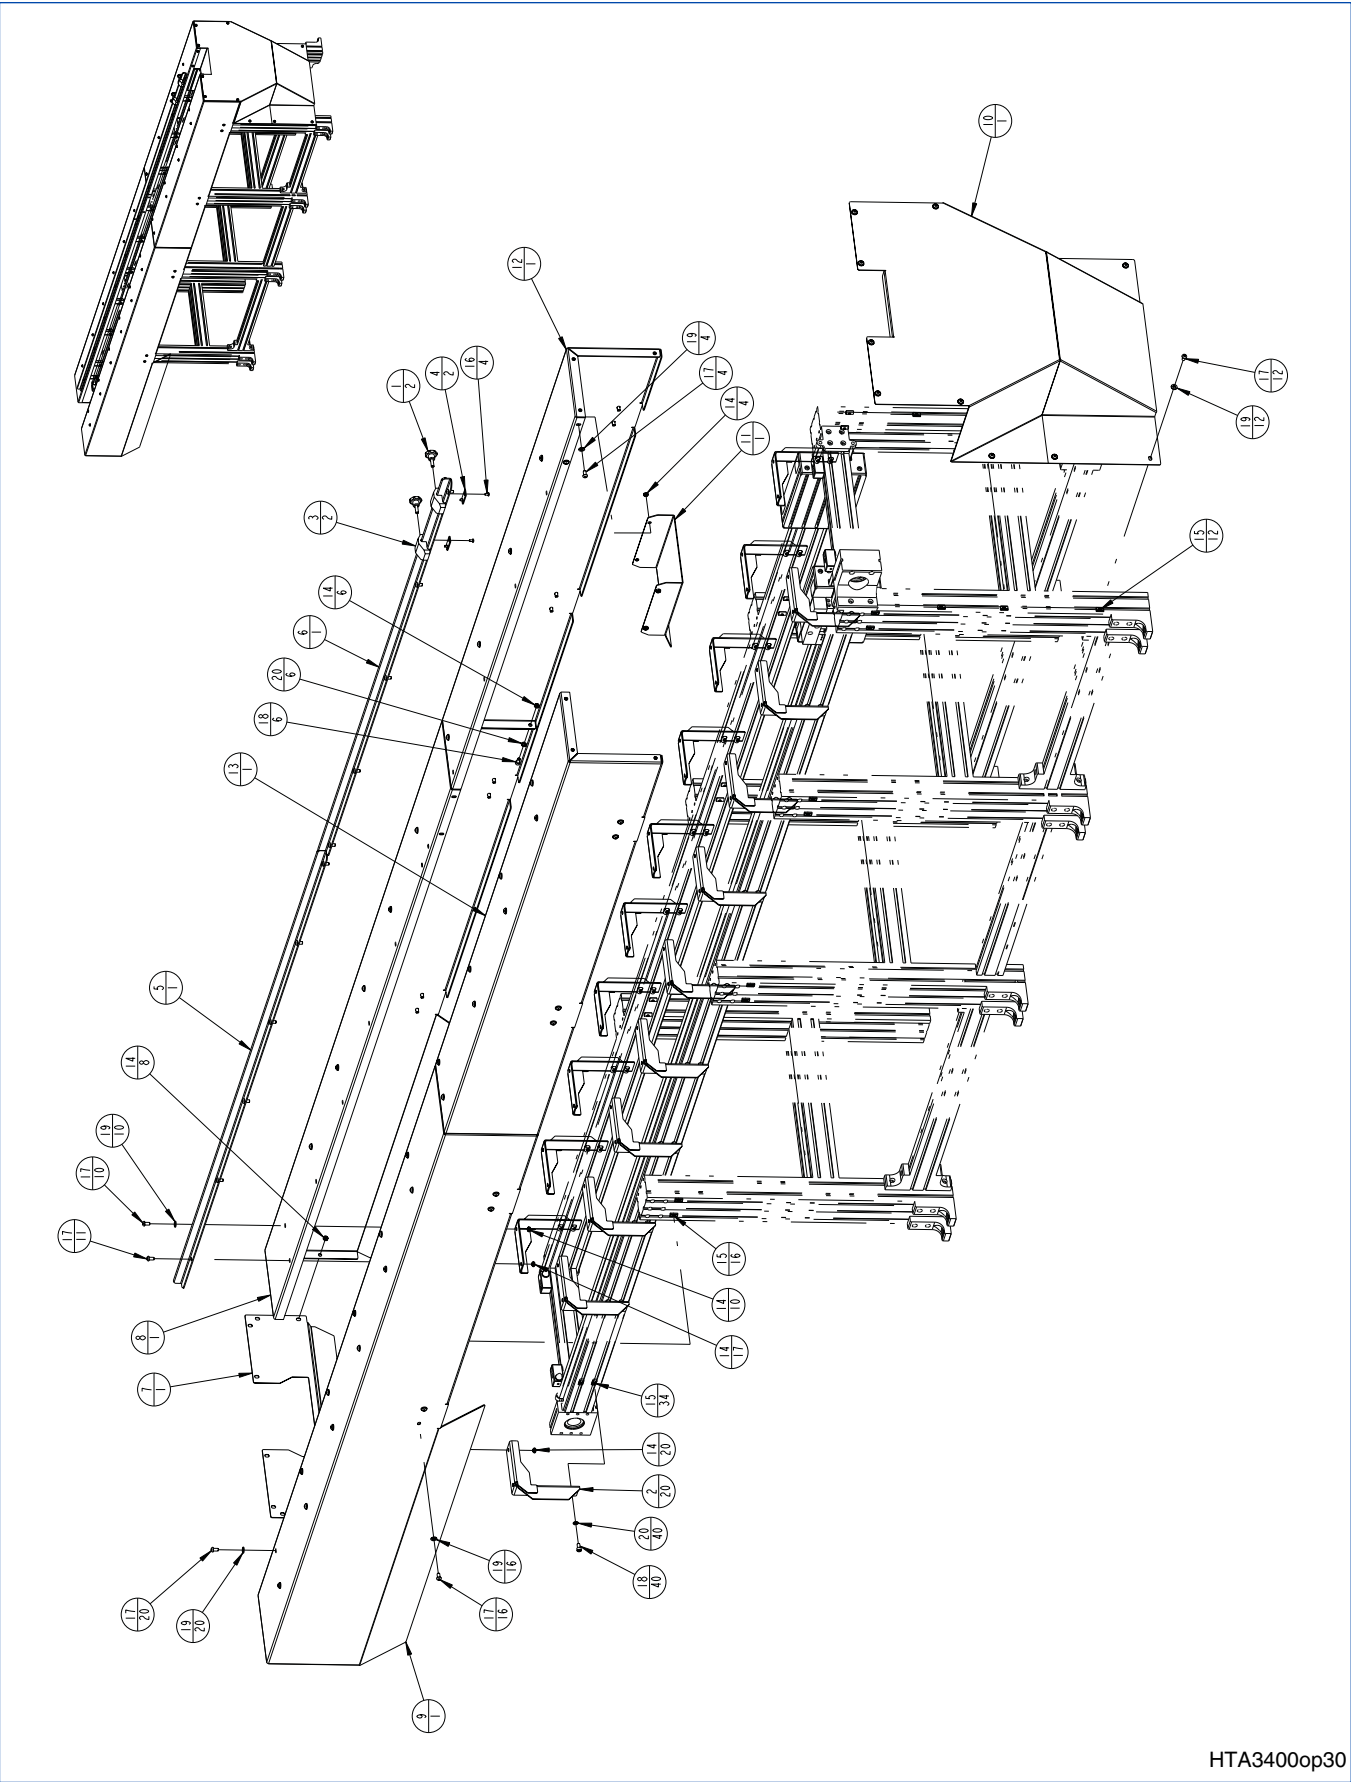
E – 4 METER CARRIAGE BASE ASSEMBLY
